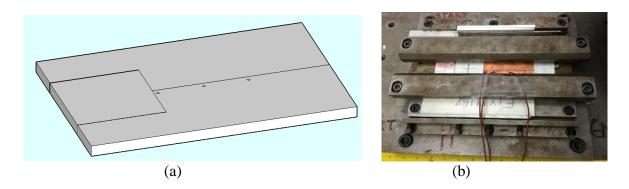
(a) Two copper workpieces enclosing an aluminum donor and (b) an aluminum donor and two workpieces held in the fixture and two thermocouples attached to a copper workpiece.
